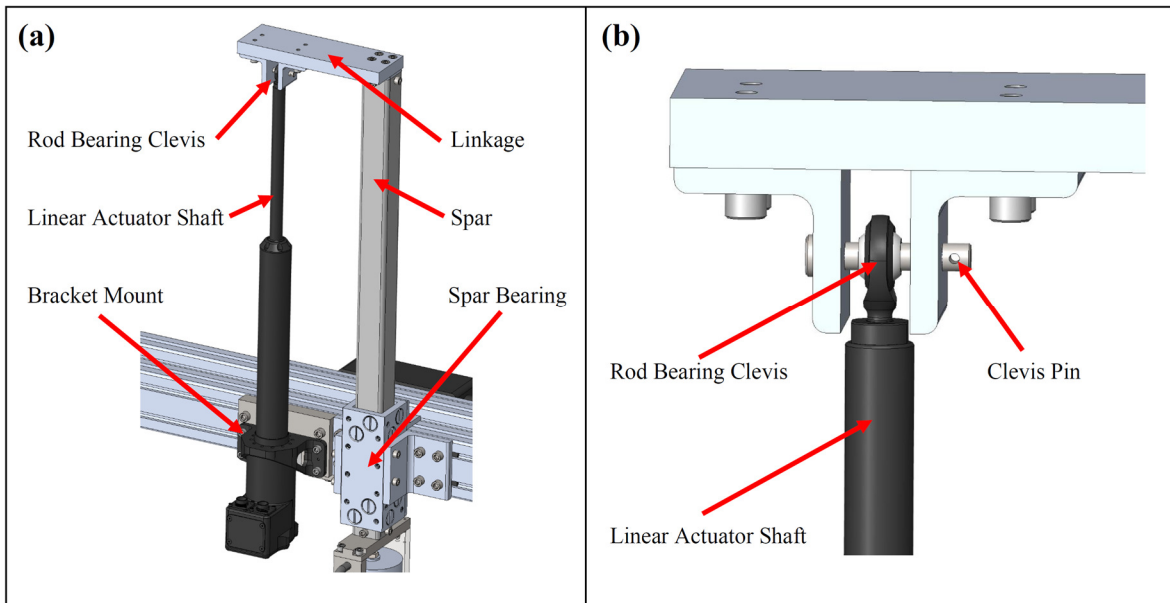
(a) Actuator Mounting Diagram. (b) Linkage Connection Detail View.
